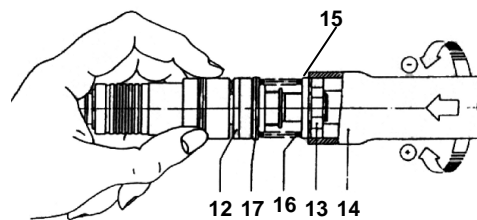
Changing the spring and adjusting the clutch; 20 Watt screwdrivers
